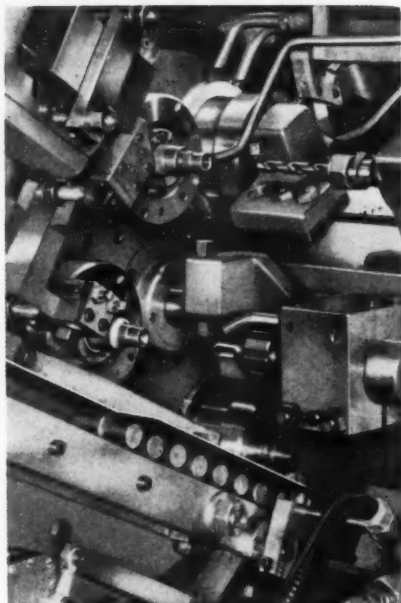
Second operation of machining gear blanks. Note the automatic hopper feed. This is a six-spindle machine. Special spring-loaded spindles are used for holding the castings.
